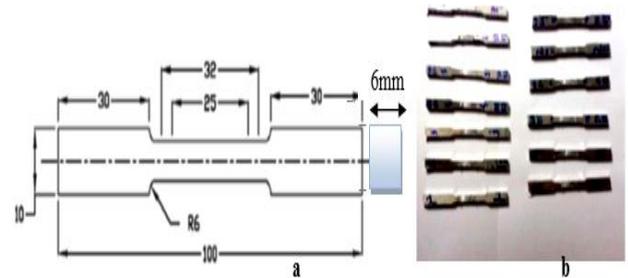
(a) ASTM Sub-Size specimen for tensile test [13]; and (b) photograph illustrates the prepared tensile specimens.
